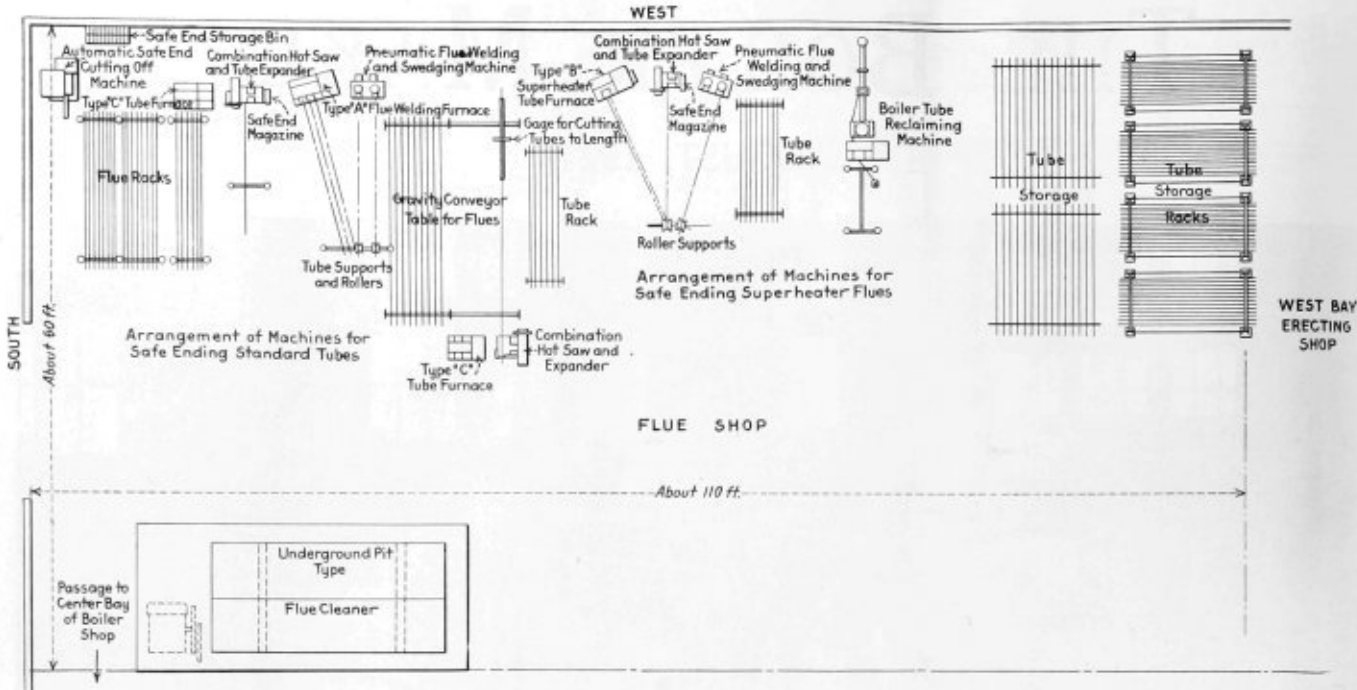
Arrangement of Machinery for Safe Ending Boiler and Superheater Flues with General Production Plan Outlined
